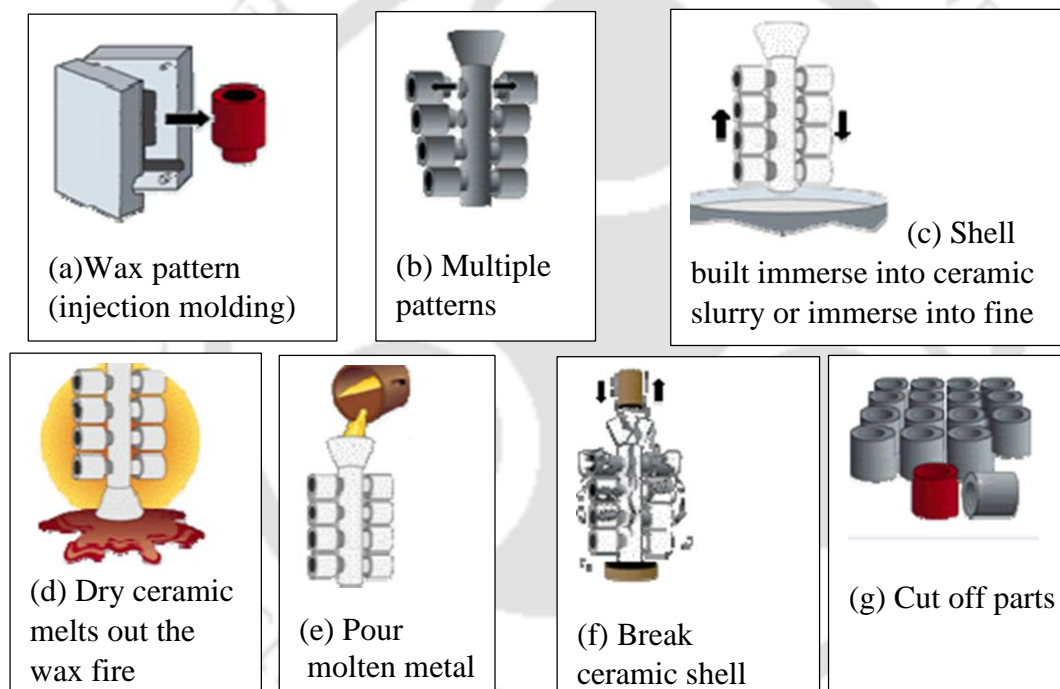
Investment casting (lost wax casting) used in industrial manufacturing
